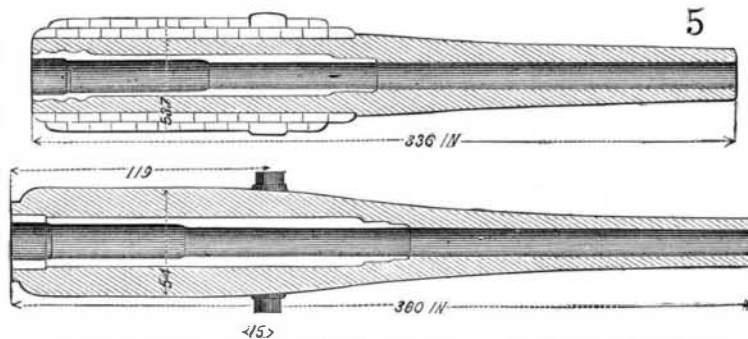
SECTIONS SHOWING STEEL TUBE AND HOOPS OF GUN.
